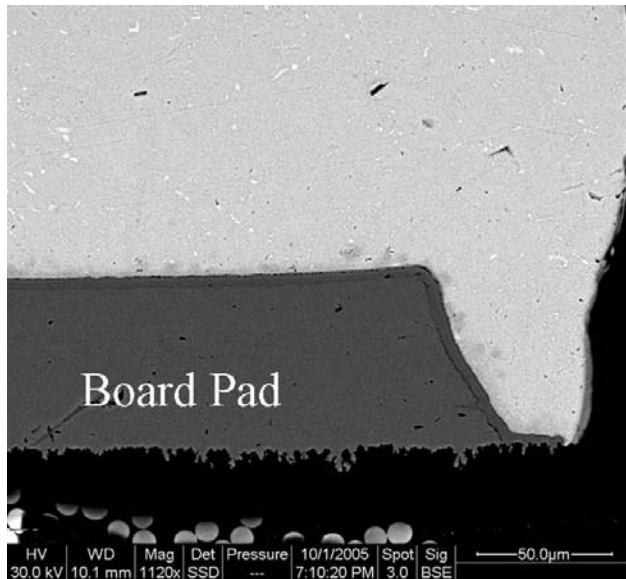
Black pad at the pad interface for ENIG- As-reflowed – Sn3.0Ag0.5Cu solder joint
